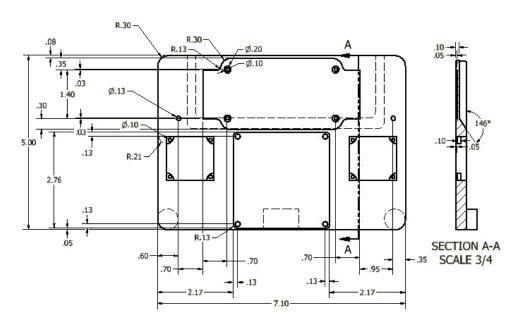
MOUNTING PLATE DRAWING 1 OF 2 FOR SYSTEM COMPONENTS (DIMENSIONS IN INCHES)
